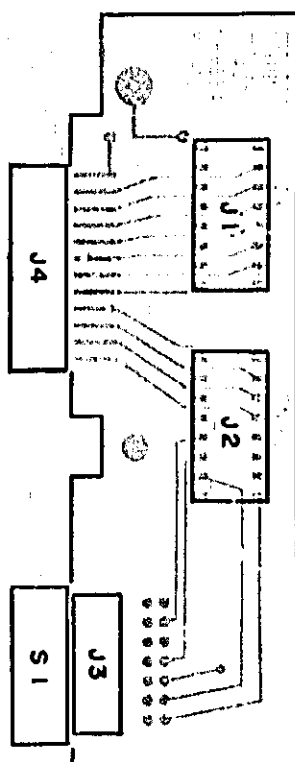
HP-IB Connector Board Assembly Component Locations.
